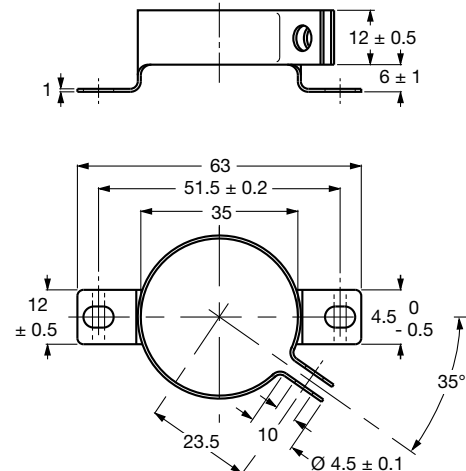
Dimensional outline of clamp for case $\varnothing D = 35 \text{ mm}$
